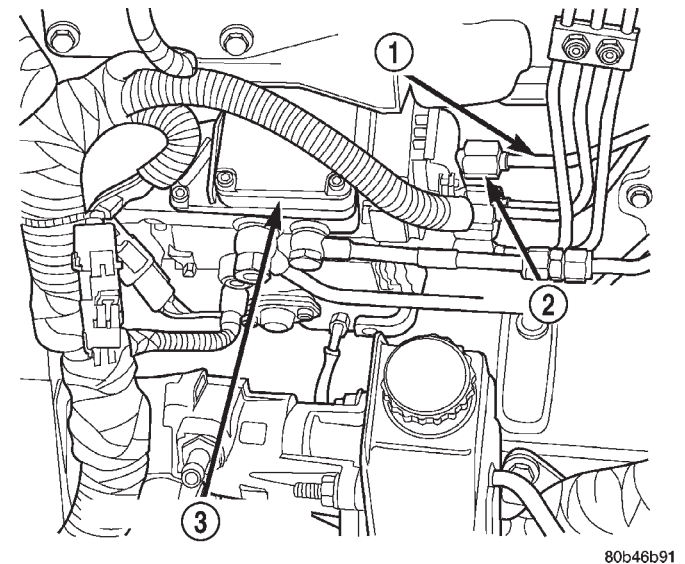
High-Pressure Lines at Fuel Injection Pump
